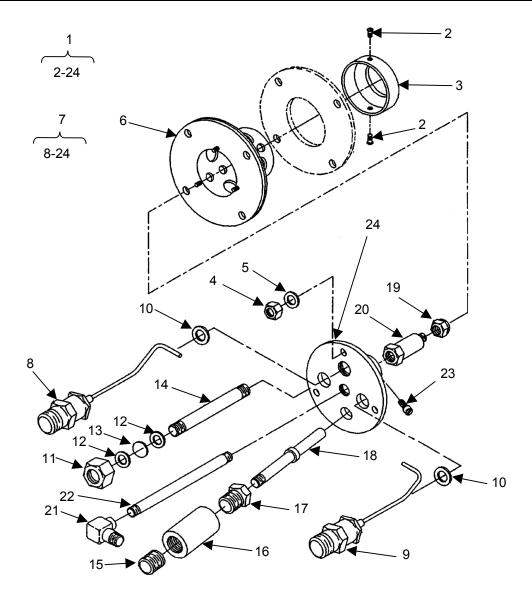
Burner Head Assembly (Sheet 1 of 2, Model M-80)
